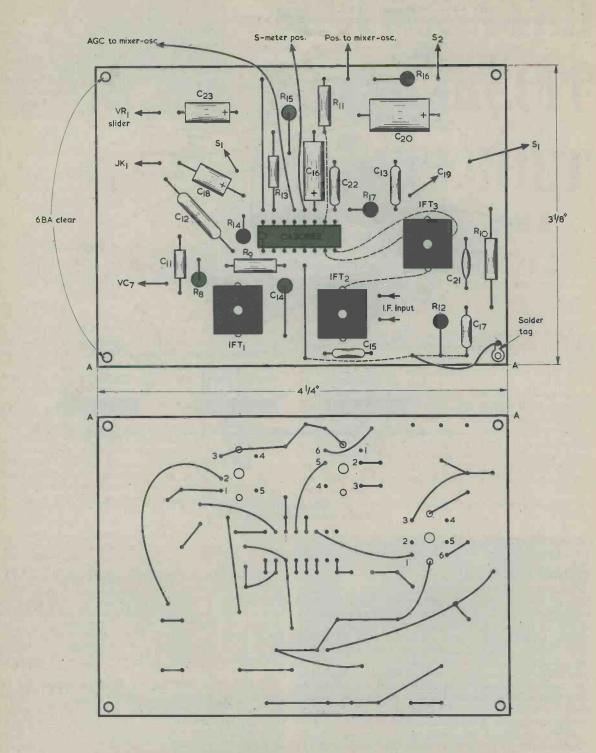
Drilling and wiring details for the i.c. component panel. This is reproduced full size and the diagram may be traced
